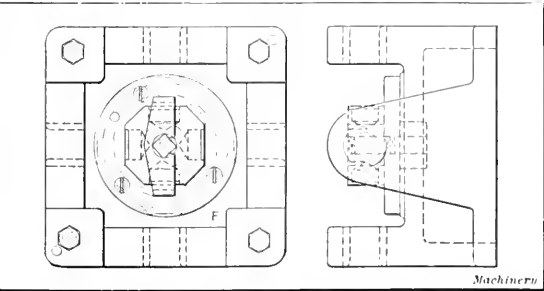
Jig used for drilling the Four Holes in the Forgings
